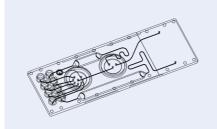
Schematic drawing of large sensor integration area platform I - Fluidic 1004
